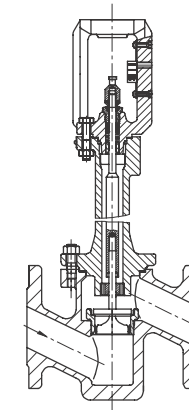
Type 3241 Valve, forged steel version, DN 15 to 80, with insulating section
